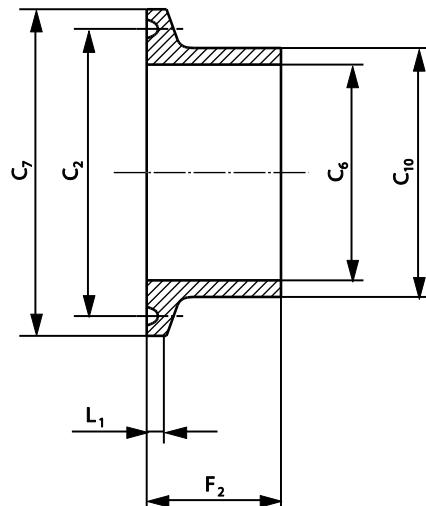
Sectional drawing of a clamp fitting acc. to ISO 2852 - DO
